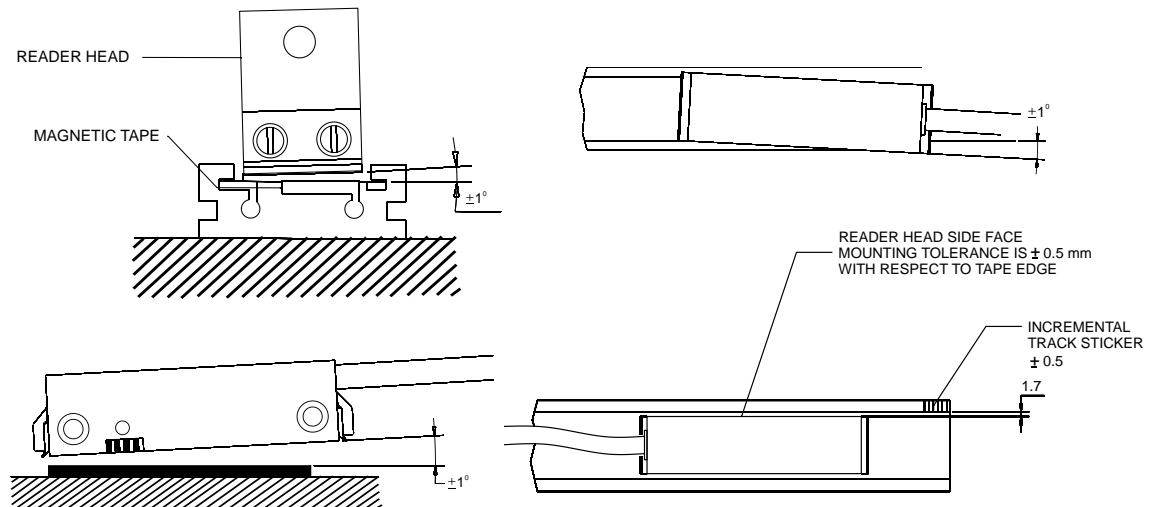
READER HEAD MOUNTING TOLERANCES
